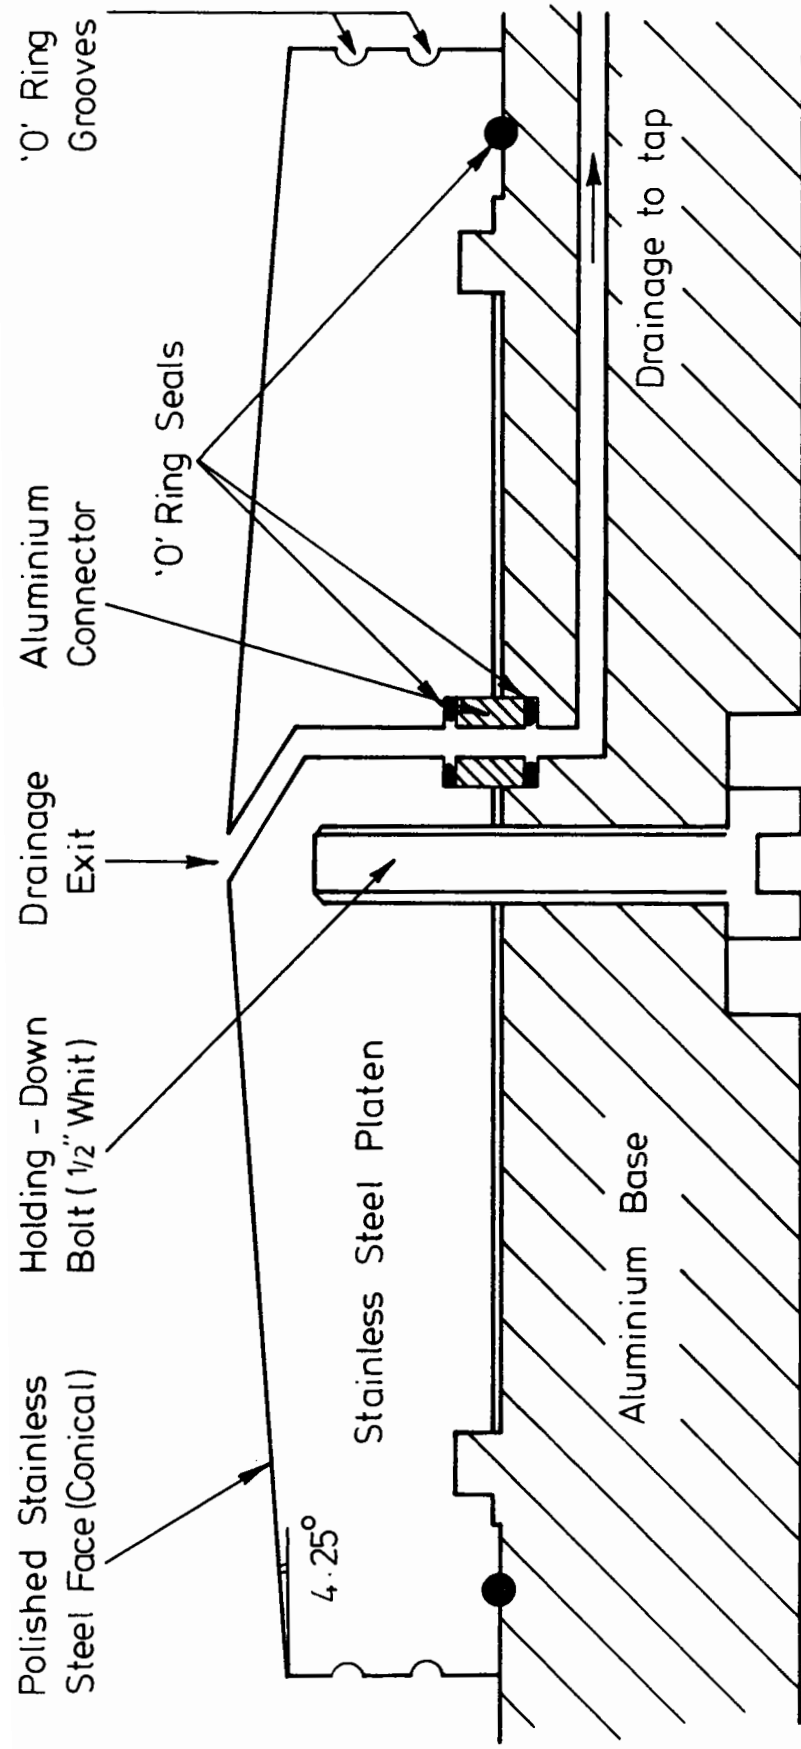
DETAILS OF CONED BASE PLATEN CONSTRUCTION AND INSTALLATION
